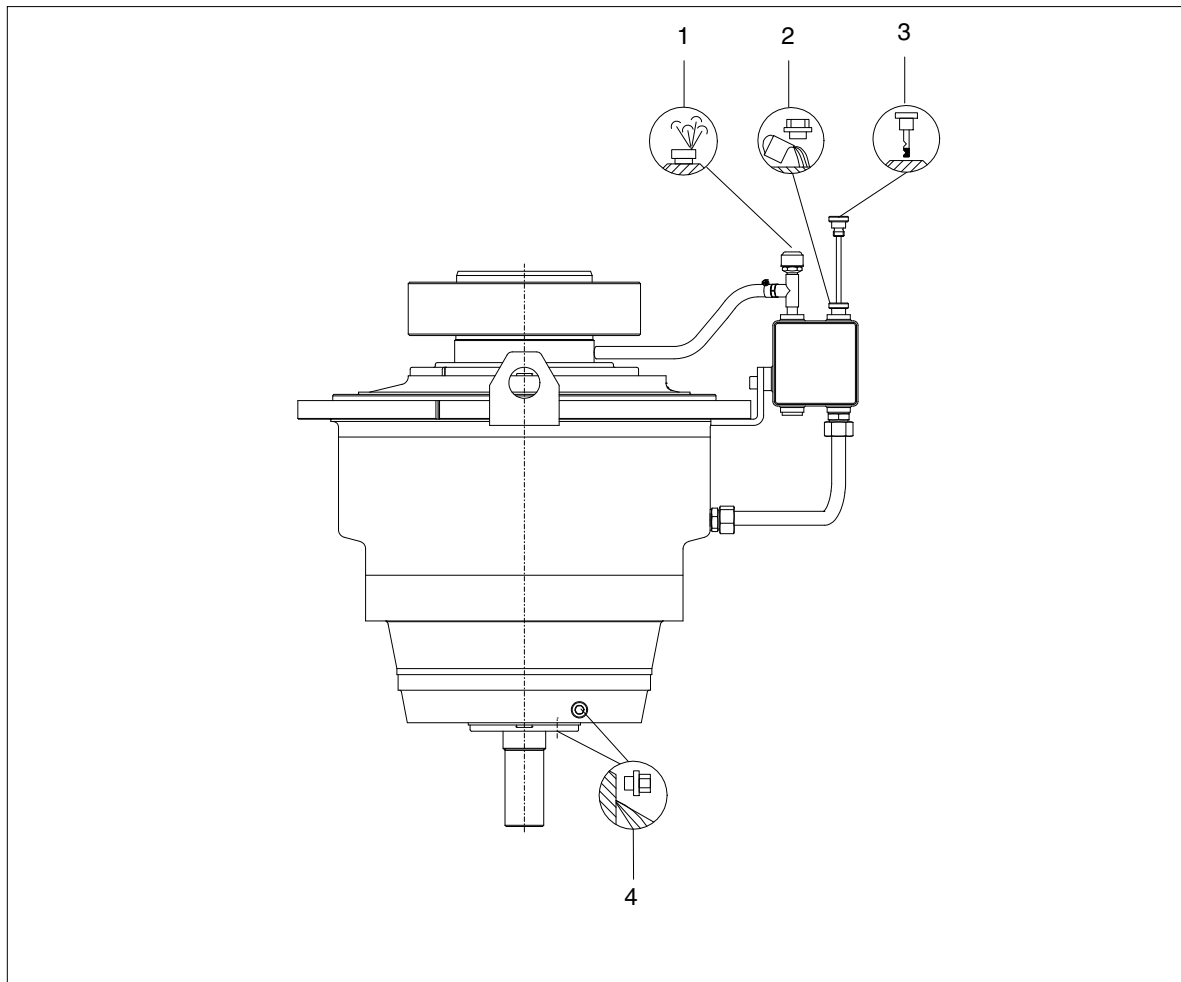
Gear-unit features on gear units of type O2C ("LSS" bottom) <sup>1)</sup>
